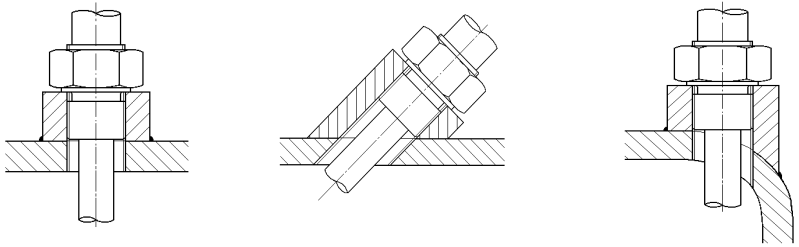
Examples of thermometers mounting TYP TOP-PKG.
